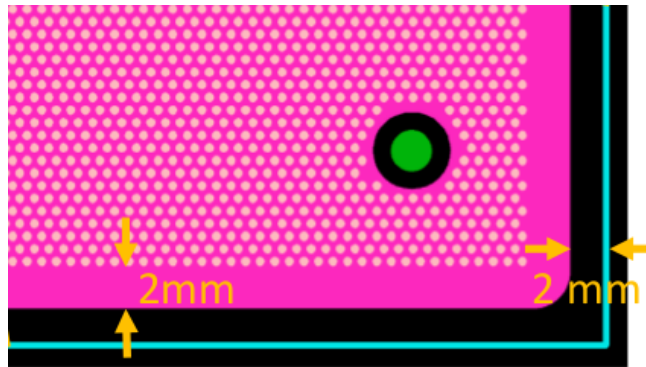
A view of the LEM corner showing the 2 mm FR4 clearance followed by 2 mm of Cu guard ring. One of the holes for the mechanical fixation is also visible.
